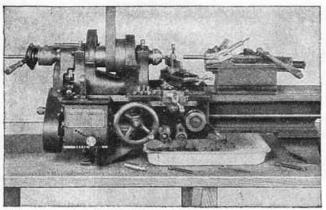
11-inch Bench Lathe Equipped with Quick Acting Draw-in Chuck, Hand Lever Feed Turret
